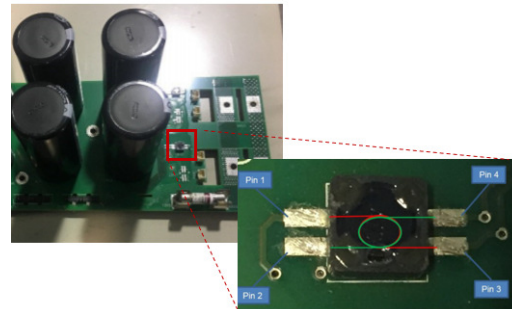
Frame R1-R3 ABB ACS580 MV Power Cell PCB and Control PCB [58, 60].
